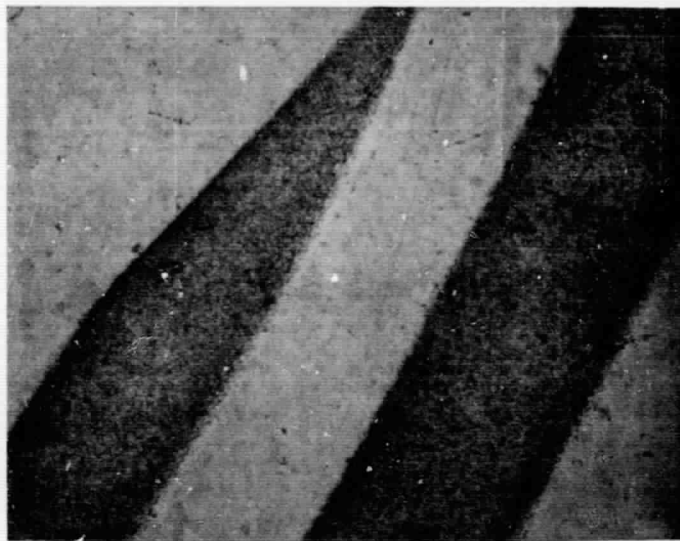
Whipple grooves machined in AVCO hot-pressed alumina by ultrasonic machining technique (100 X).
